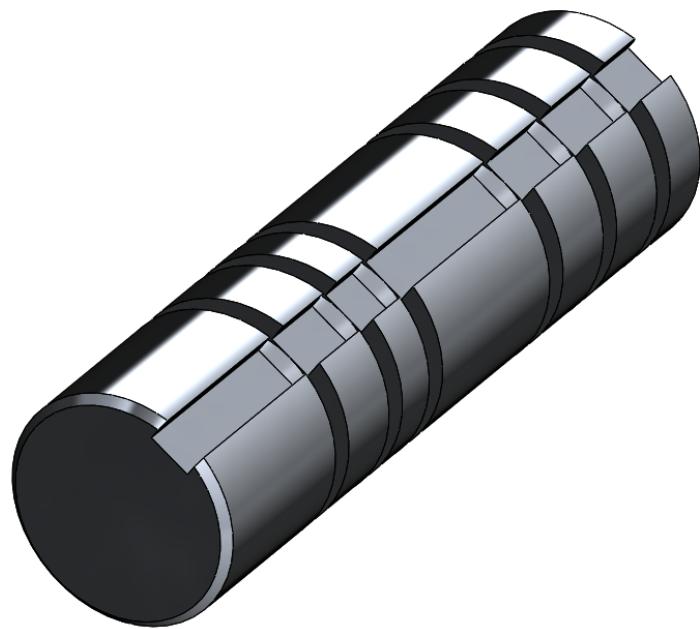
Hirani, Asimm: Gearbox Drive Shaft
